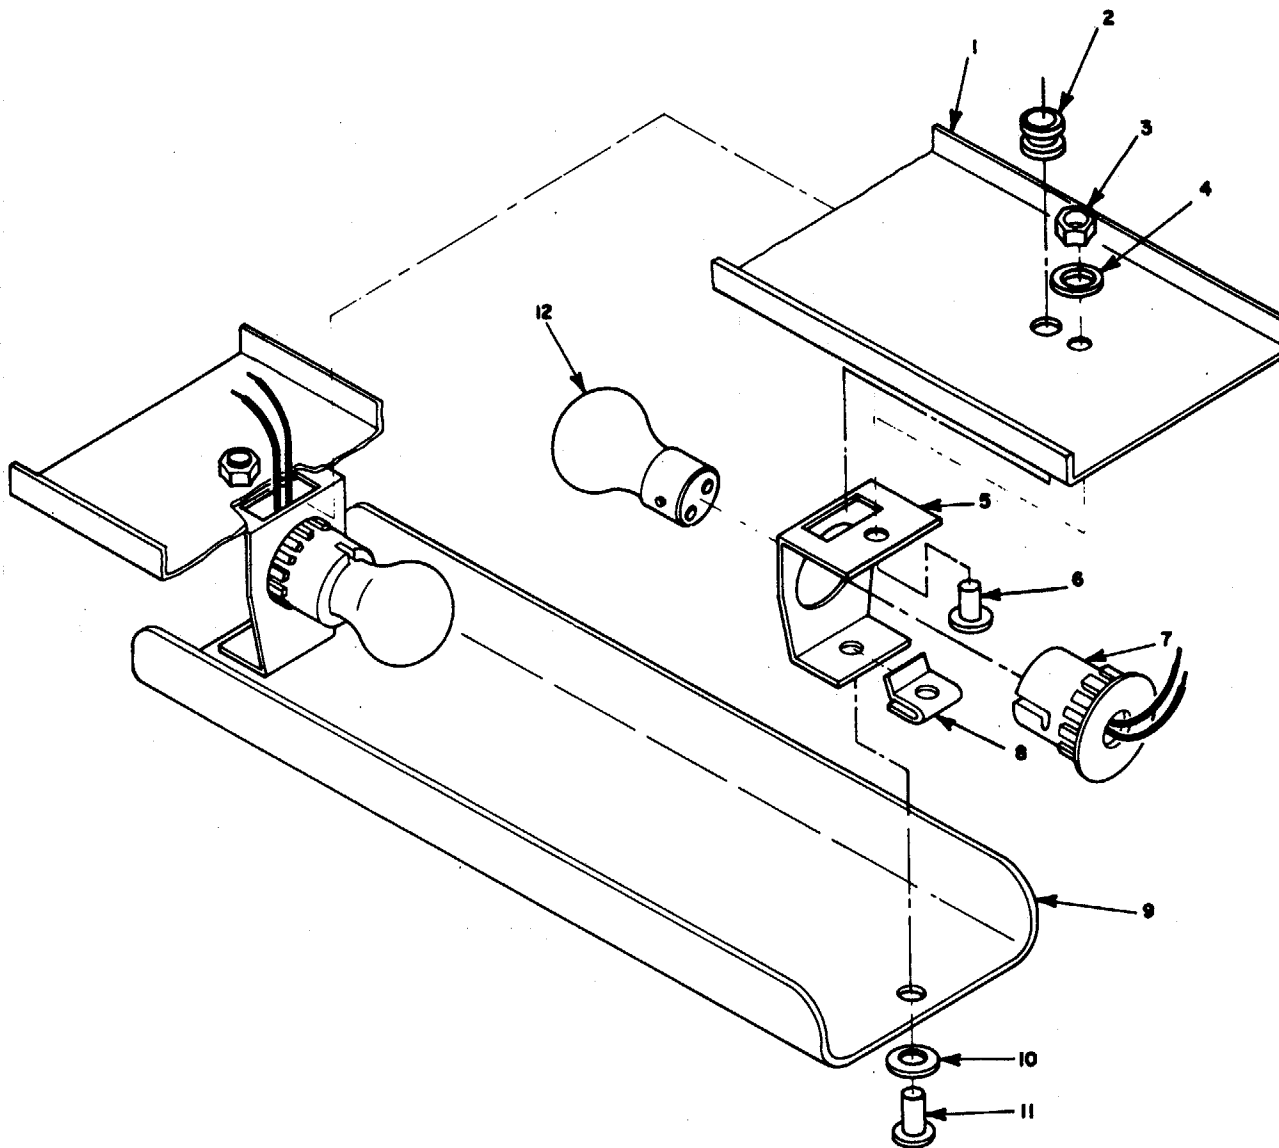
S-561/TTC-41(V), AC Lamp Assembly.
